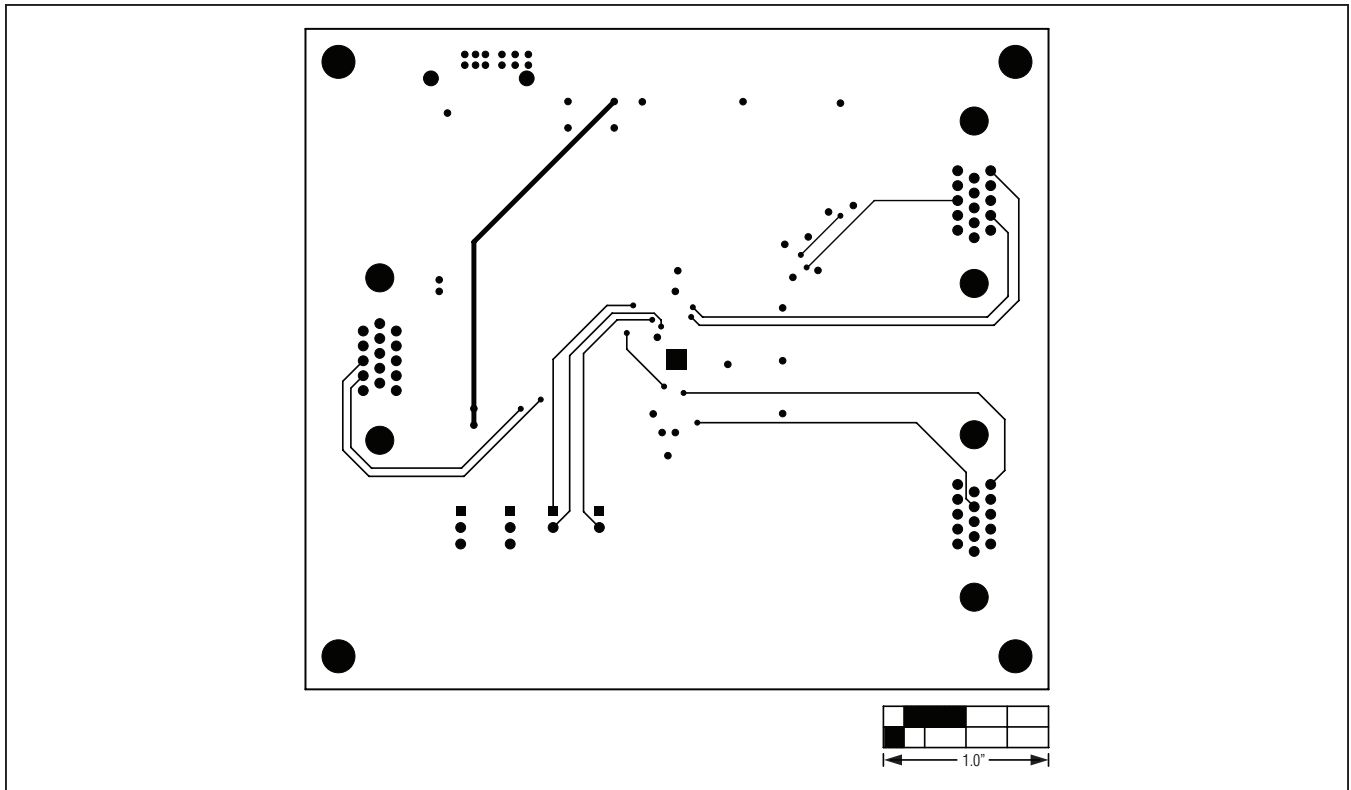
MAX14983E EV Kit PCB Layout—Solder Side
